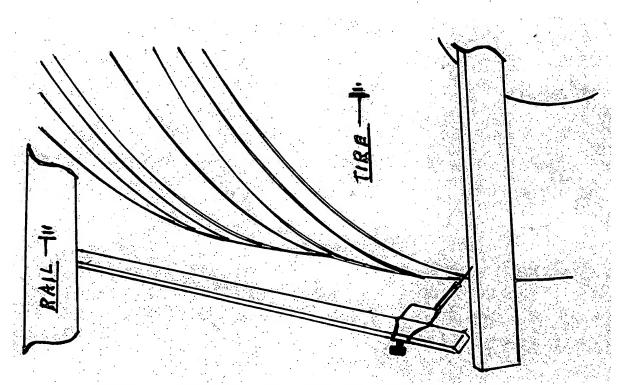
CHECKING ANGLE ON AXLE SPRING PAD
